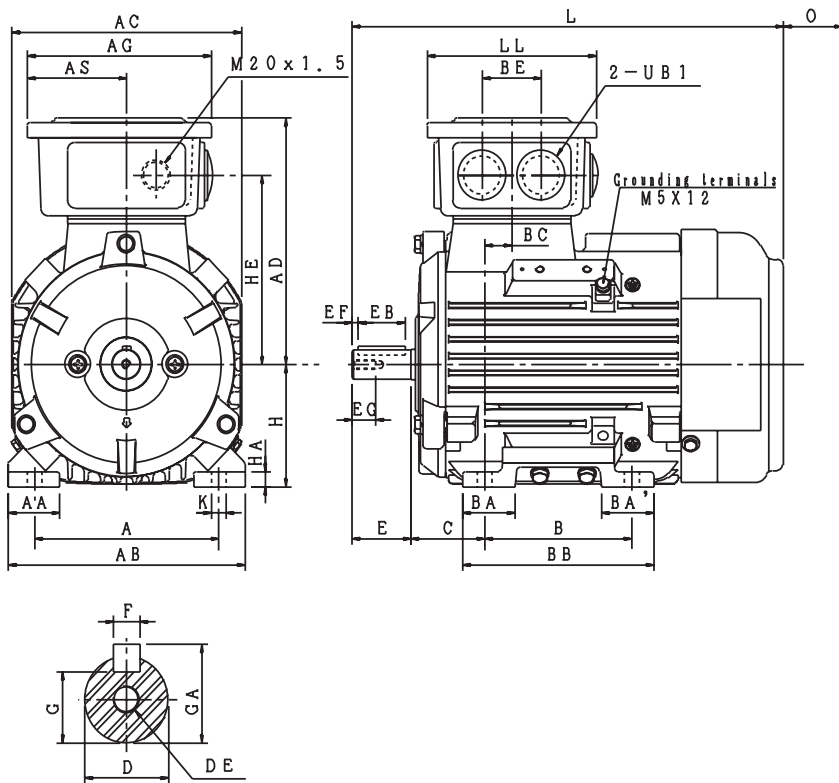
Outline drawing of cast iron design, feet version, mounting B3; frame size 80M – 112M
